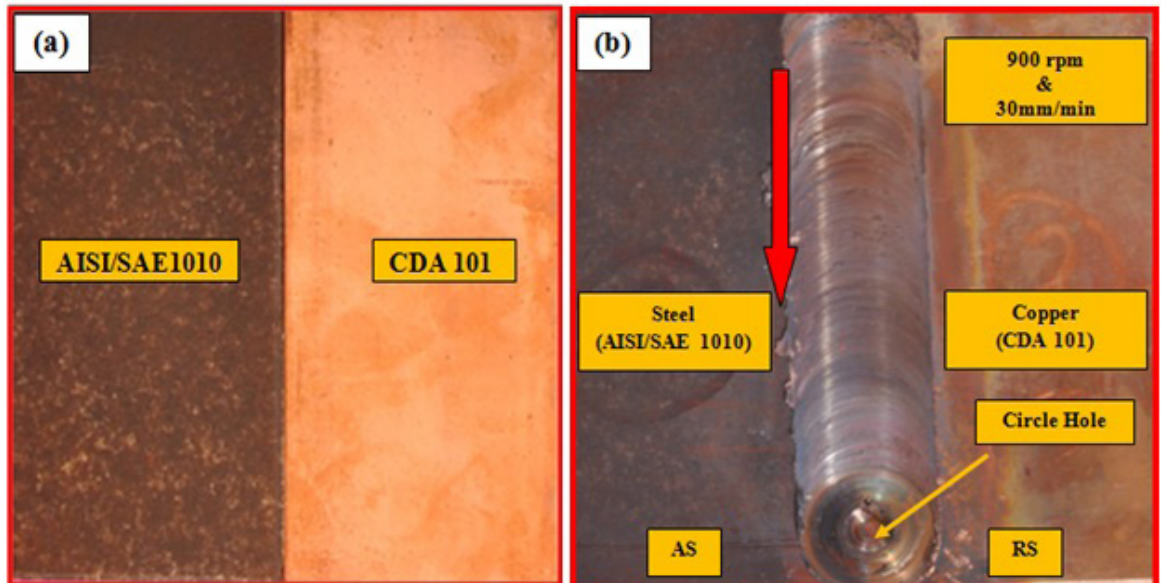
Before and after welding copper and steel plates. (a) Before welding; (b) After welding.
